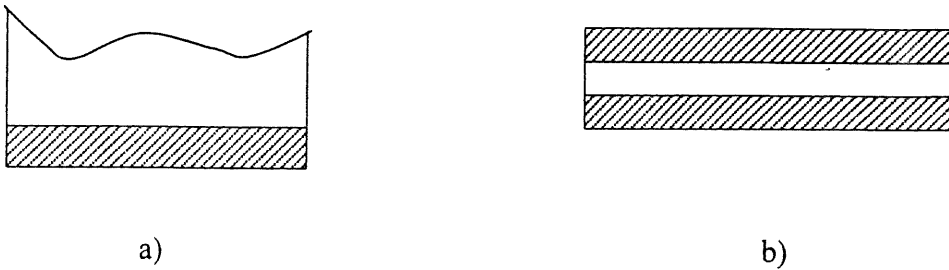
Illustration of two types of moulding: a) Moulding with simple tool plate, b) Moulding with double tool plate.
